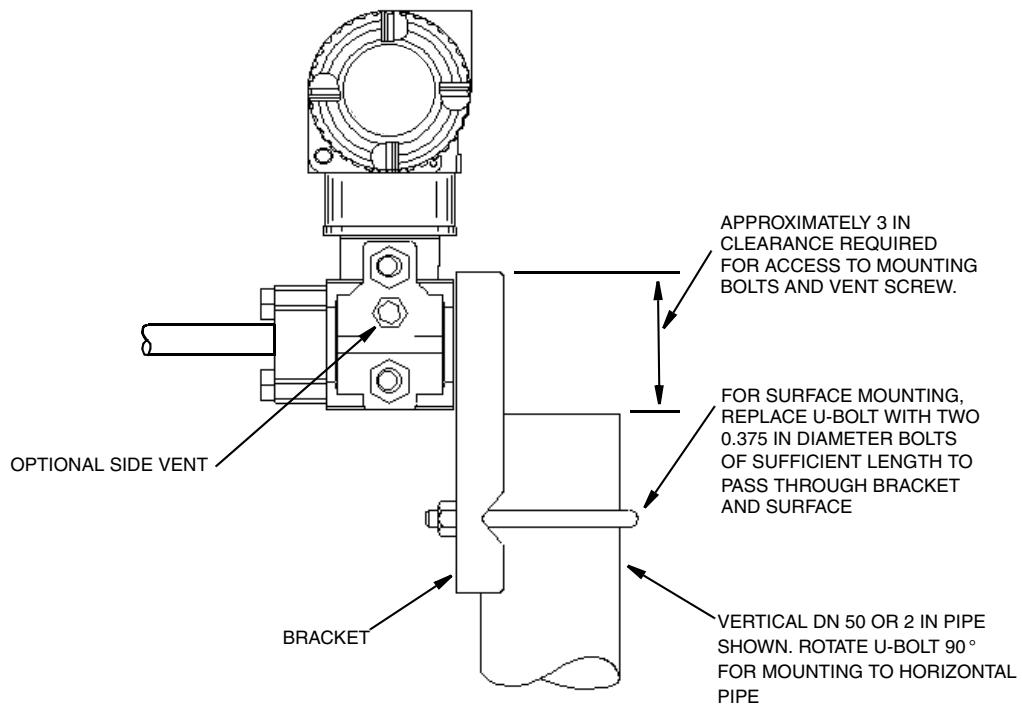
Pipe or Surface Mounted Transmitter Using a Standard Bracket
